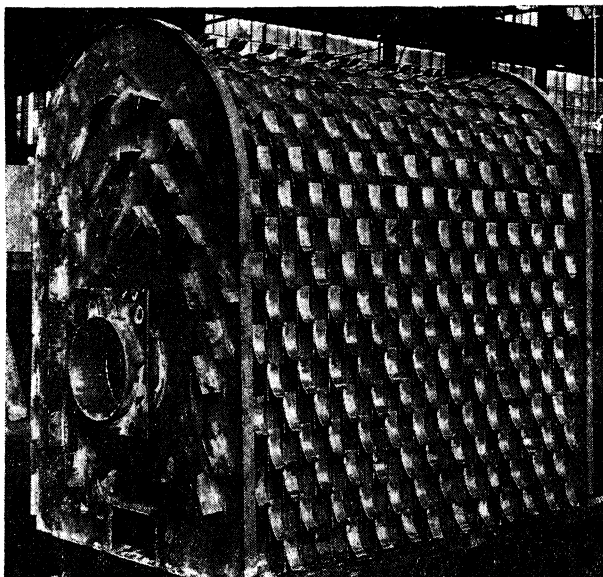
Combustion chamber for shop heater of arc welded steel construction. Welding made possible unusual design of fins. Heating efficiency 87%.
